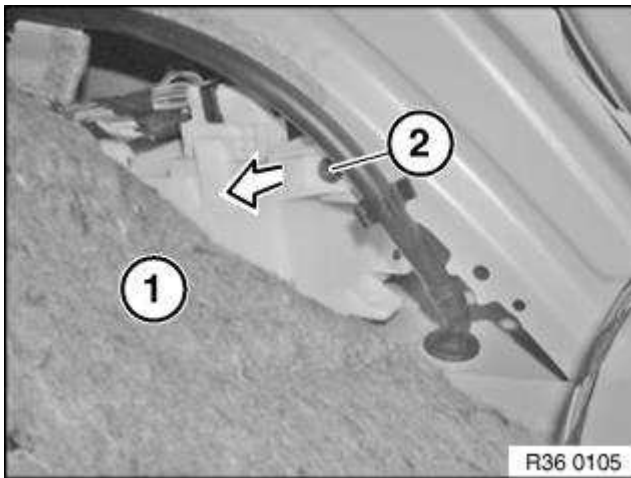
Press Sound-Insulating Material (1) To One Side Slightly
